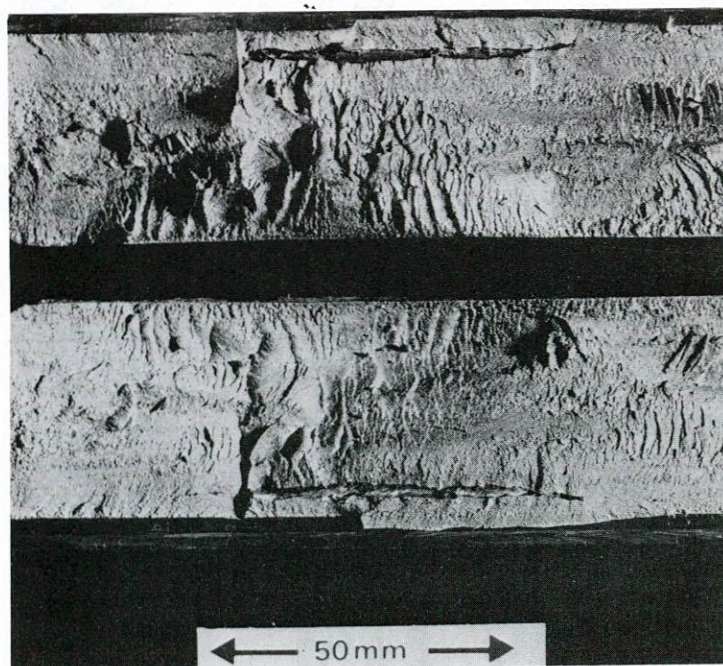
Fracture surfaces revealing slag line, defect 17.
